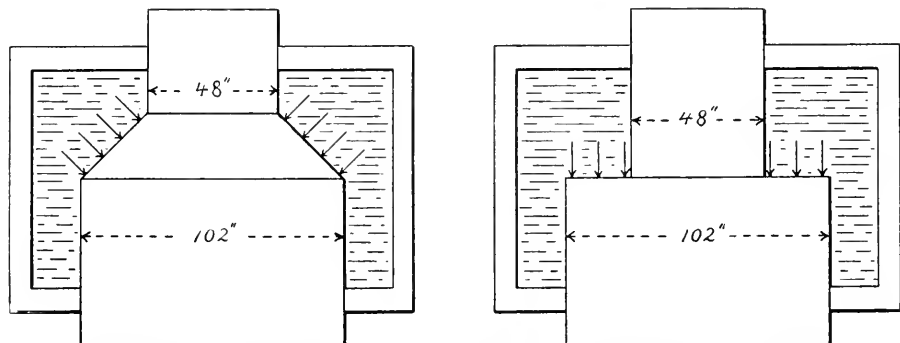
ILLUSTRATING THE FAILURE OF A CONE-TOPPED BOILER.
